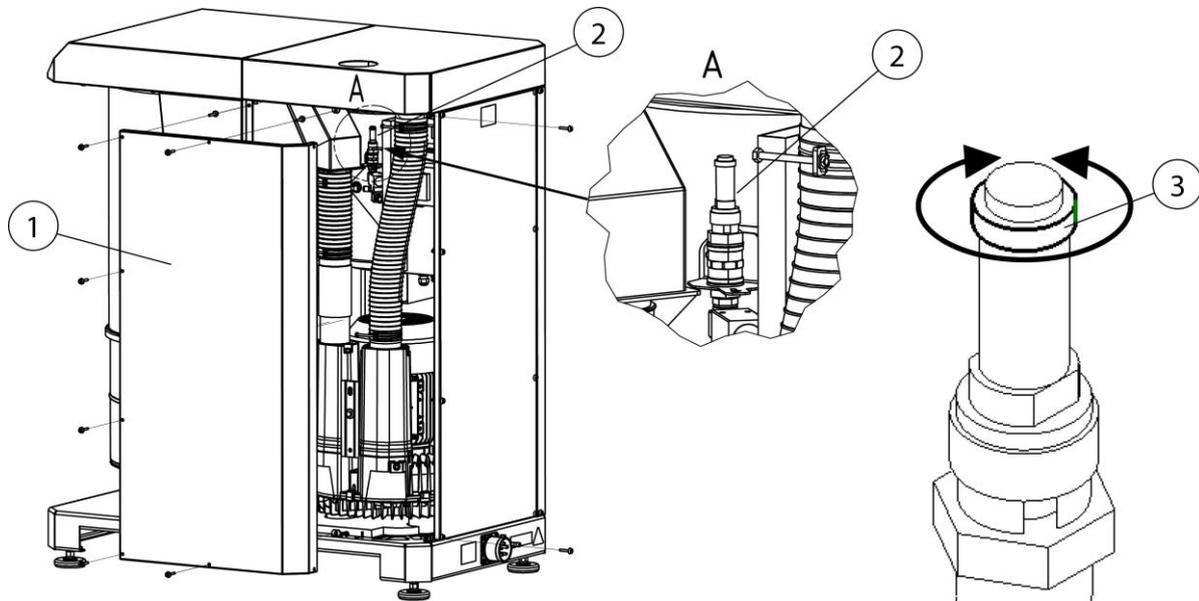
Access to the compressed air vessel + compressed air safety valve
